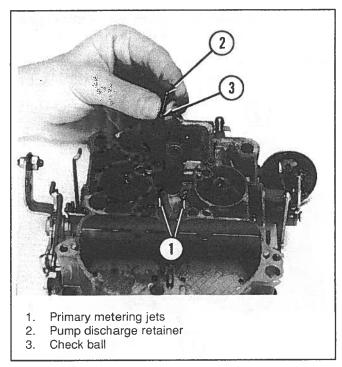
Installing Check Ball, Retainer And Primary Jets
